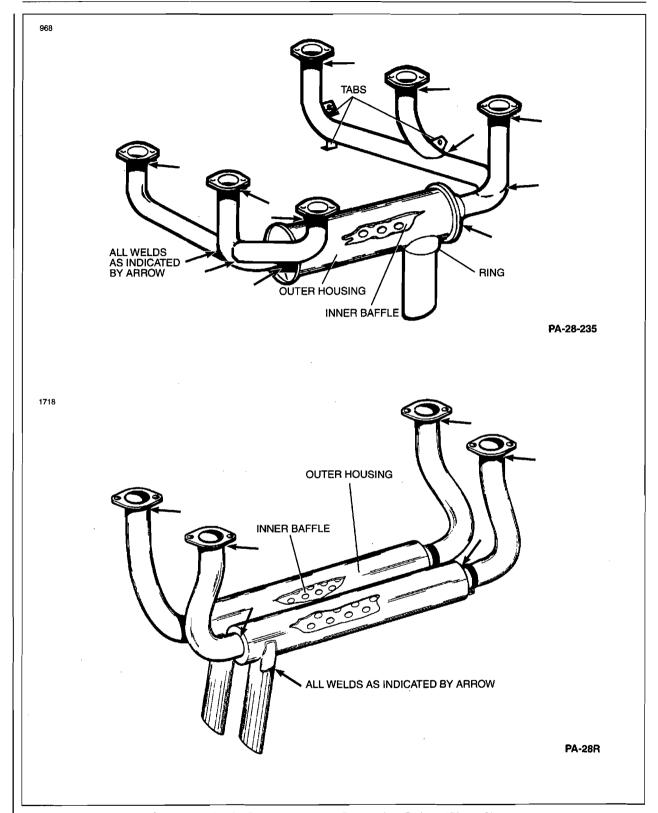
Exhaust System Inspection Points (Sheet 2)
